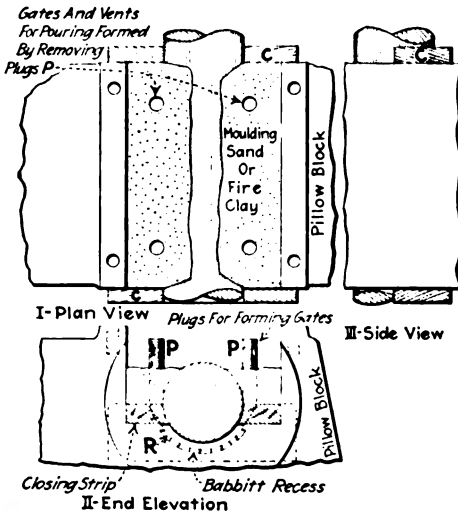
Tamping of journal with molding sand or fire clay. The plugs, *P*, are withdrawn and, after the ends of the babbitt recess, *R*, are closed with wooden collars, *C*, the bearing may be poured.
